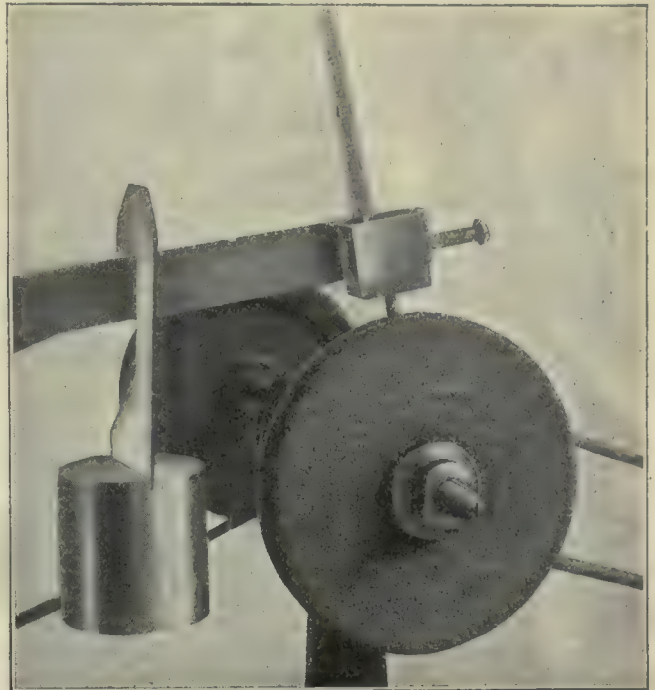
THERMOMETER AND TEST PIECE IN BLOCK
